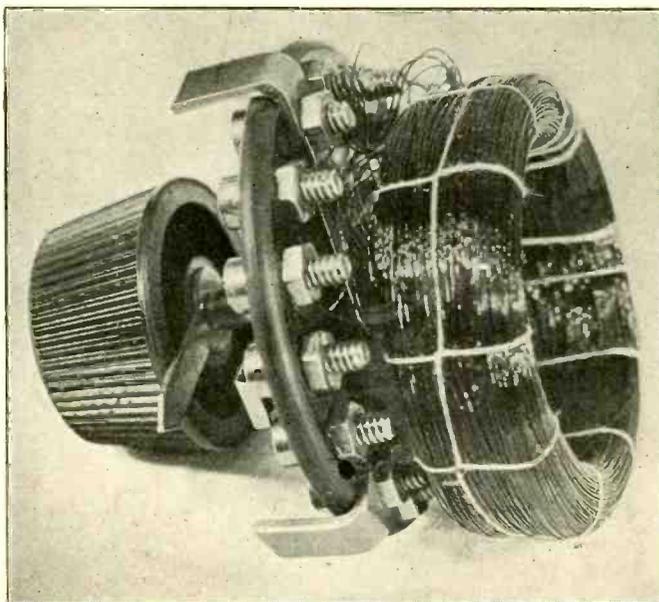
, the coil mounted on the back of the switch and the taps fastened to switchpoints.
